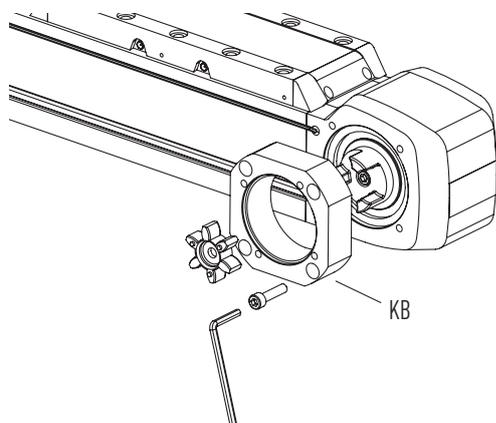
Attaching the elastomer insert and mounting the coupling housing KB on the linear axis HM-B
